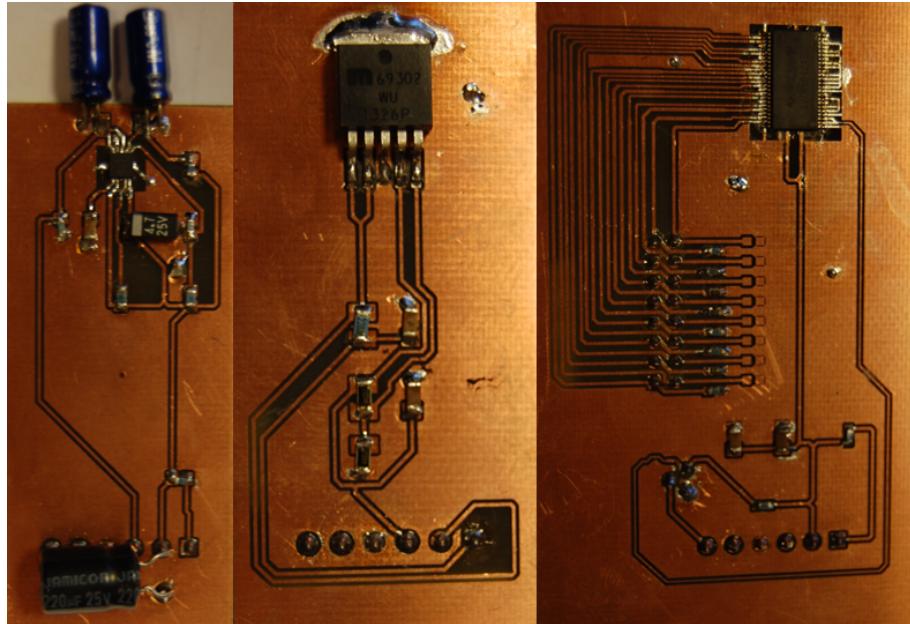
Picture of PCB boards, from left we have, TPS51200, MIC69302WU and SN74AVCB164245
